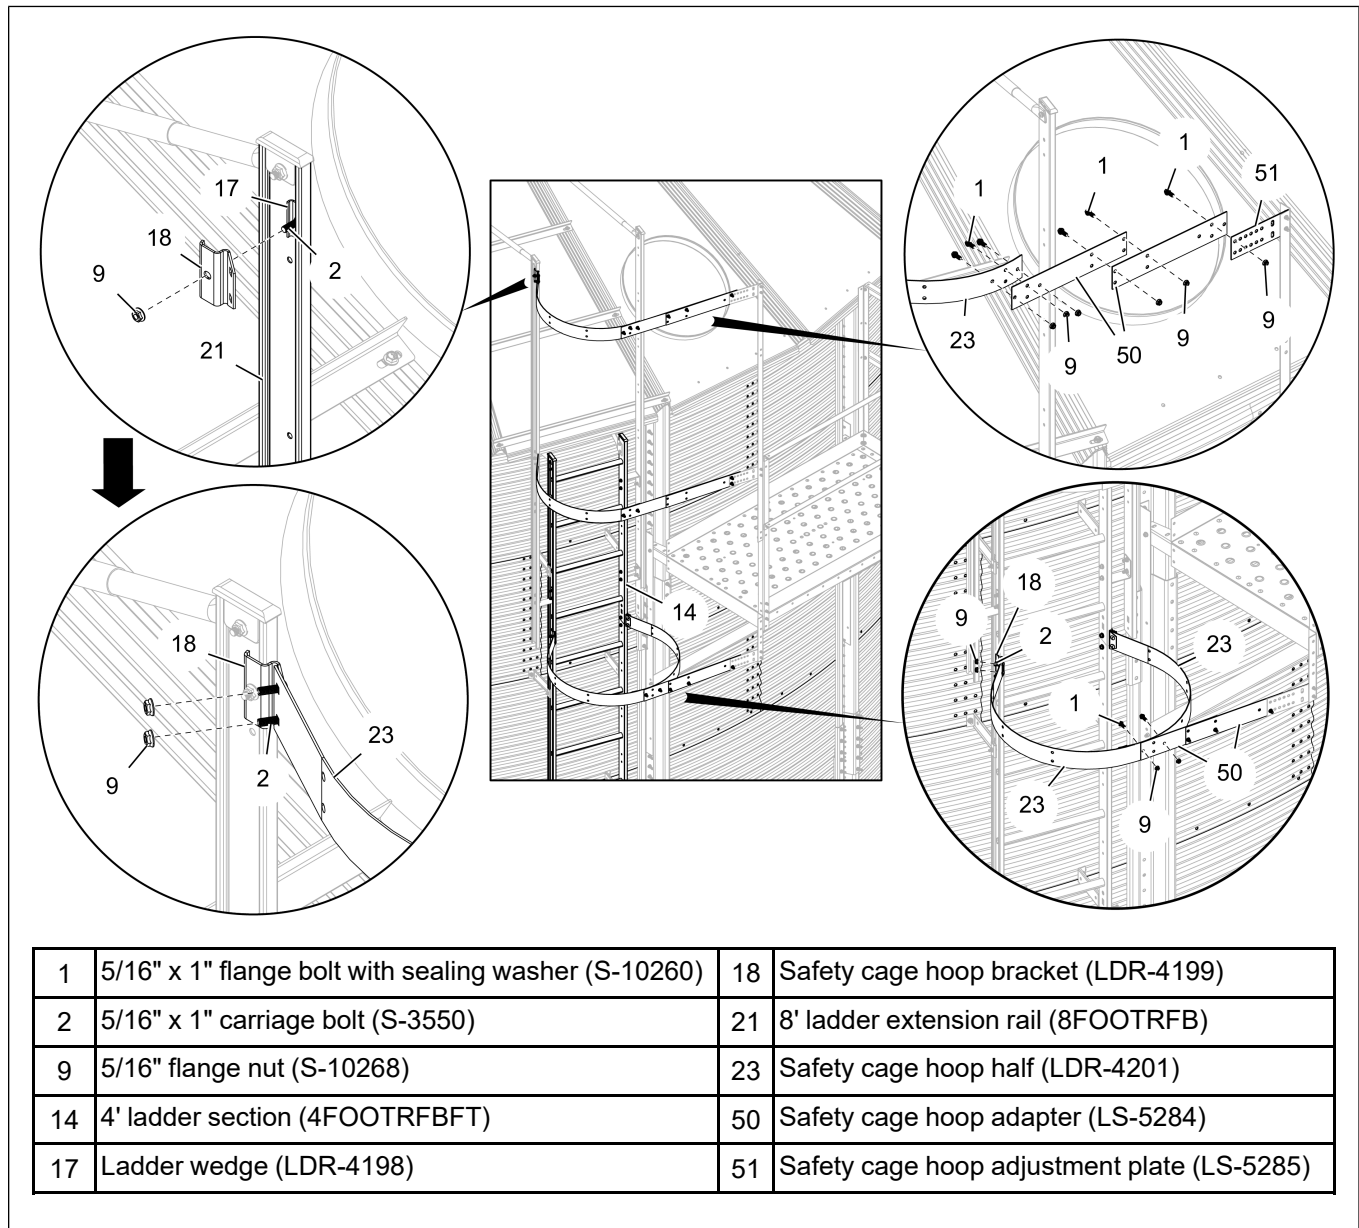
Installing the extension angle, adapter angle and adjustment plates
